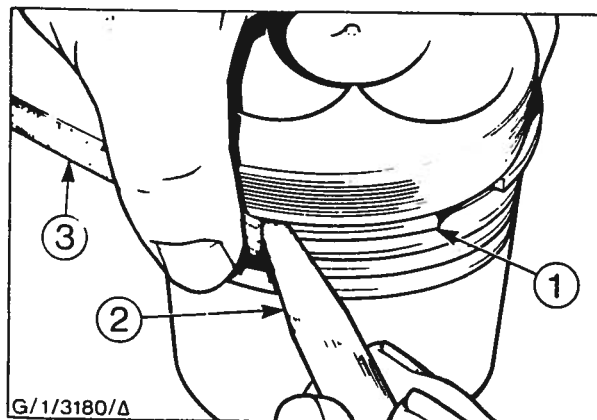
Taper Ring to Groove Clearance Check - Turbocharged Engines
